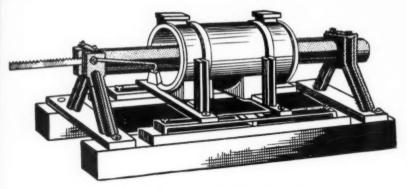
Wilkinson's boring machine, invented ground 1780.
